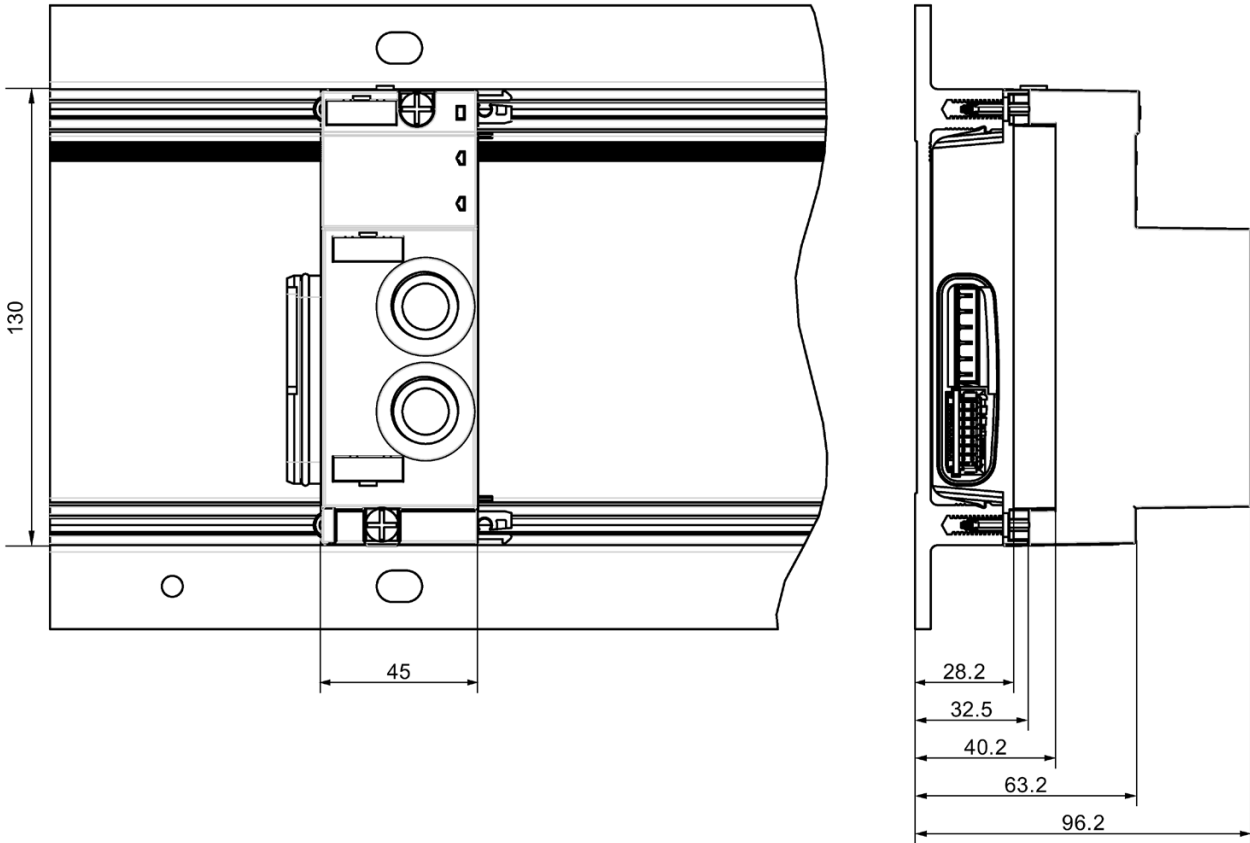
Dimension drawing of electronic module with CM IO 1xM23 connection module
